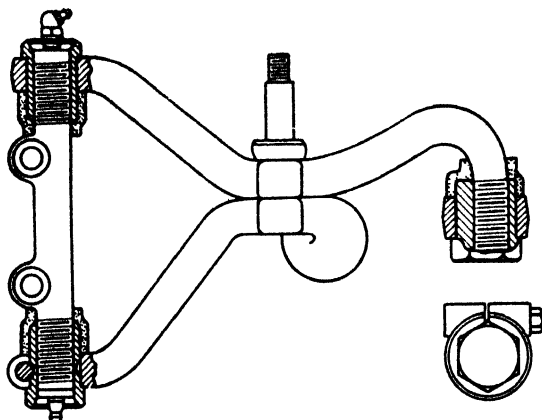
MEANS FOR ADJUSTING CAMBER AND CASTER (CHRYSLER).
